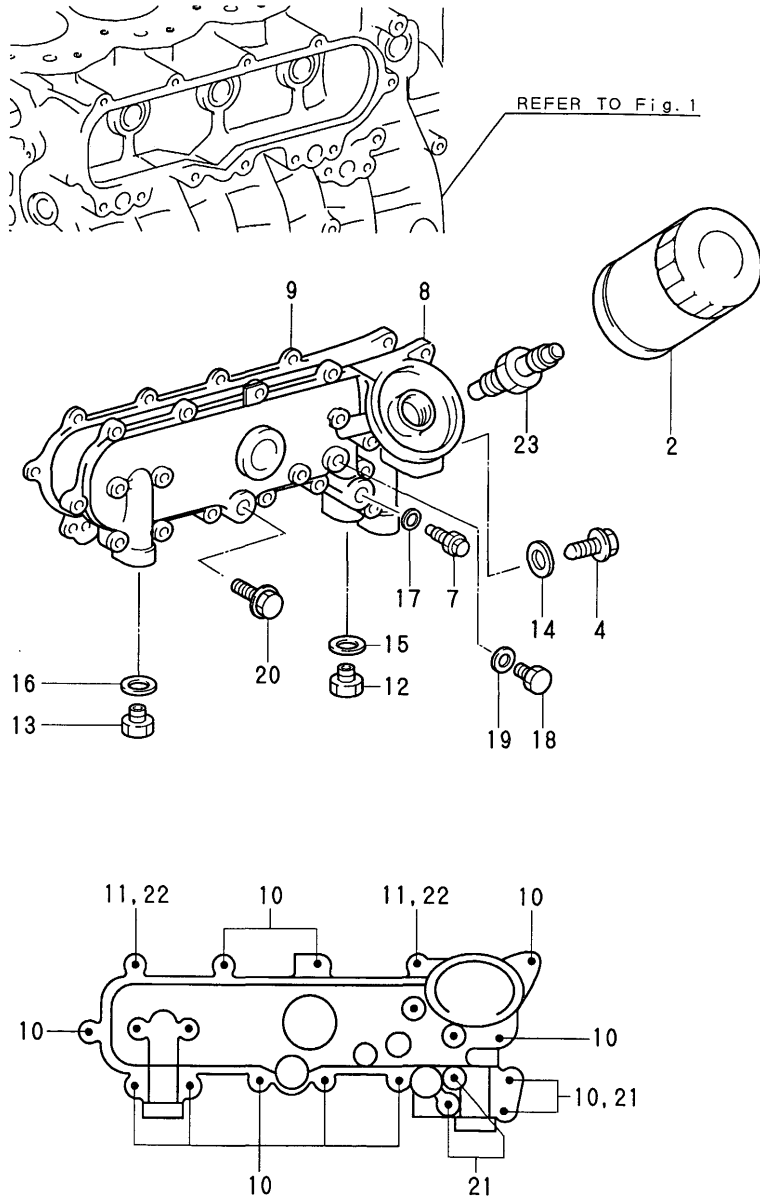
LUB. OIL COOLER COVER(6LP-DTE)
